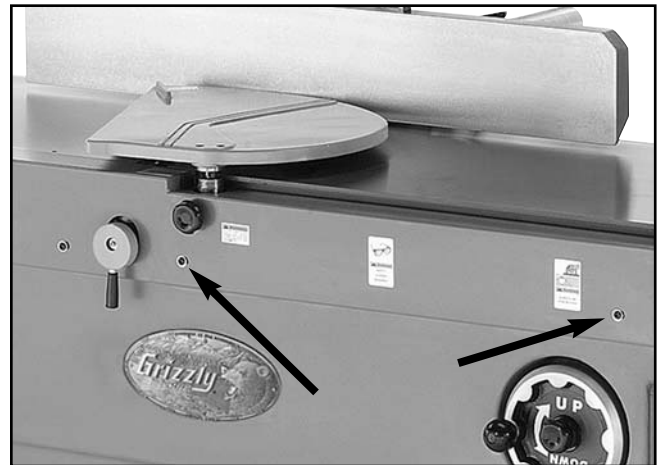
Hex bolts and flat washers used to secure the front eccentric cover to the jointer base.
